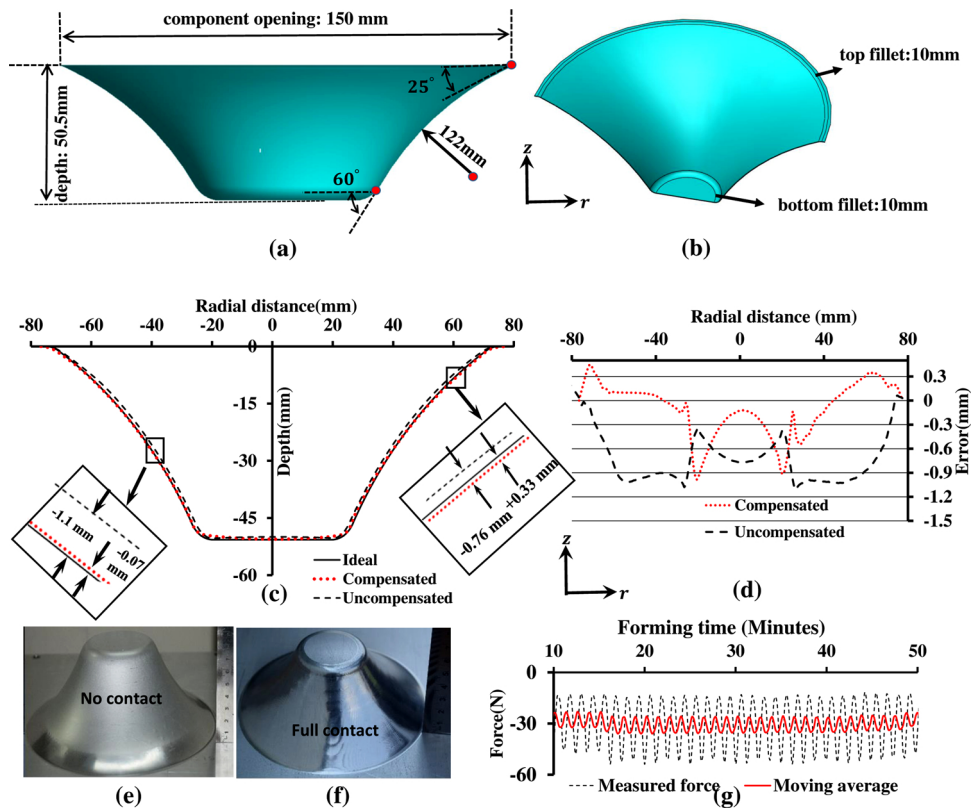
Varying wall angle component with 150 mm opening diameter (a), (b) CAD model and geometrical parameters, (c) profile comparisons, (d) profile error, (e) component formed using uncompensated tool path, (f) component formed using compensated tool path, (g) axial force on support tool.
